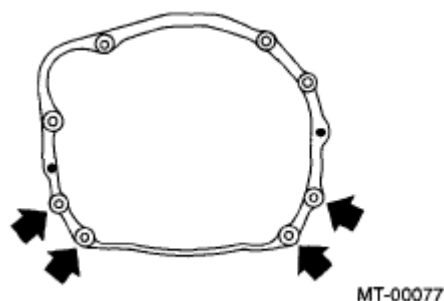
Locating Lower Side Of Transmission To Engine Bolts And Nuts - MT Model
